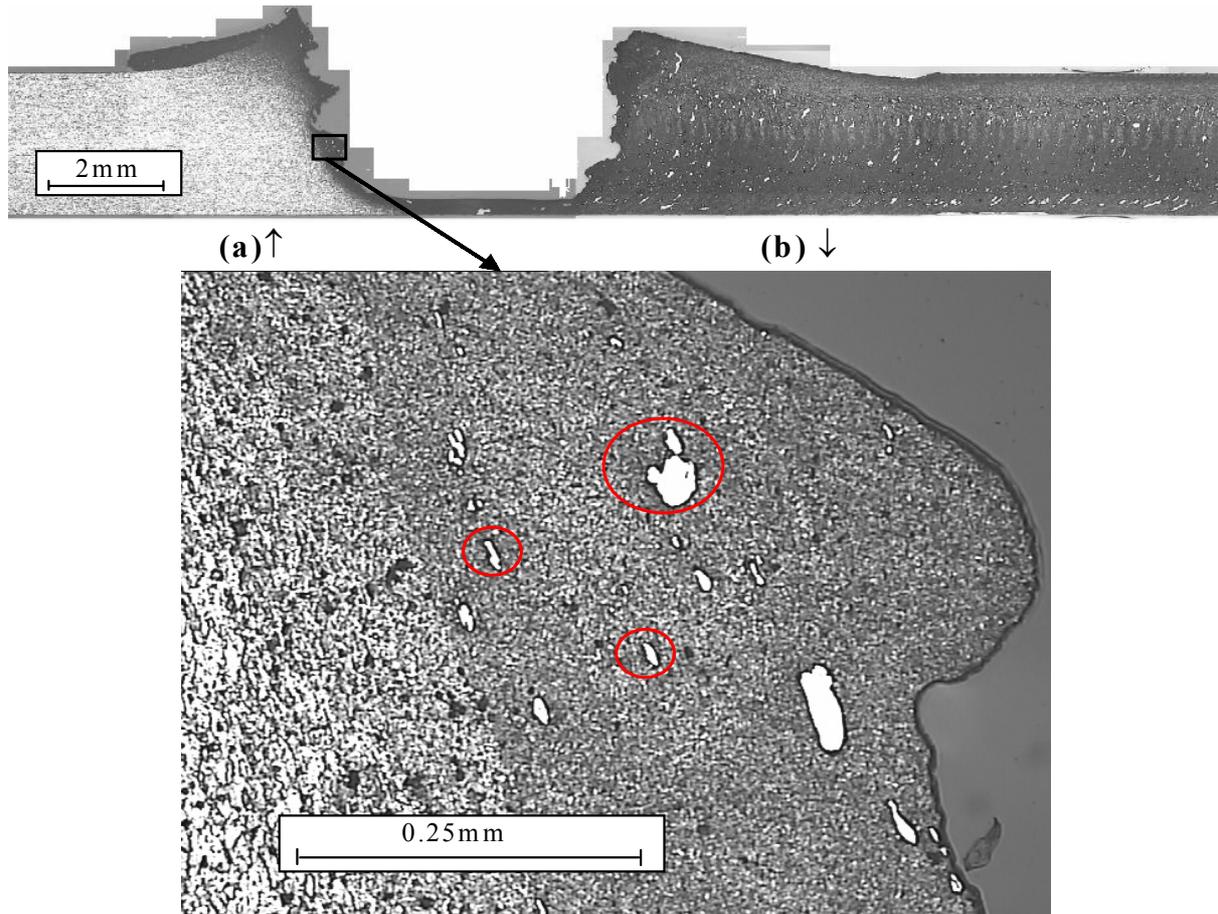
Longitudinal section through a 2024-T3 to 2024-T3 weld (DMC-E1): (a) macrosection on the weld axis centre-line and (b) detail in the thread region. Examples of the resulting copper flecks (bright patches) have been ringed.
